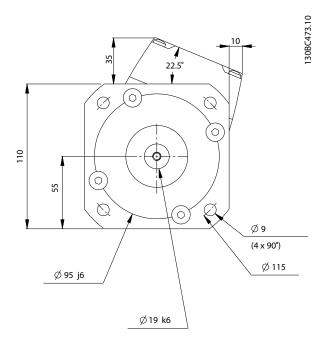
Front View: Servomotor with IEC Flange, without Brake
